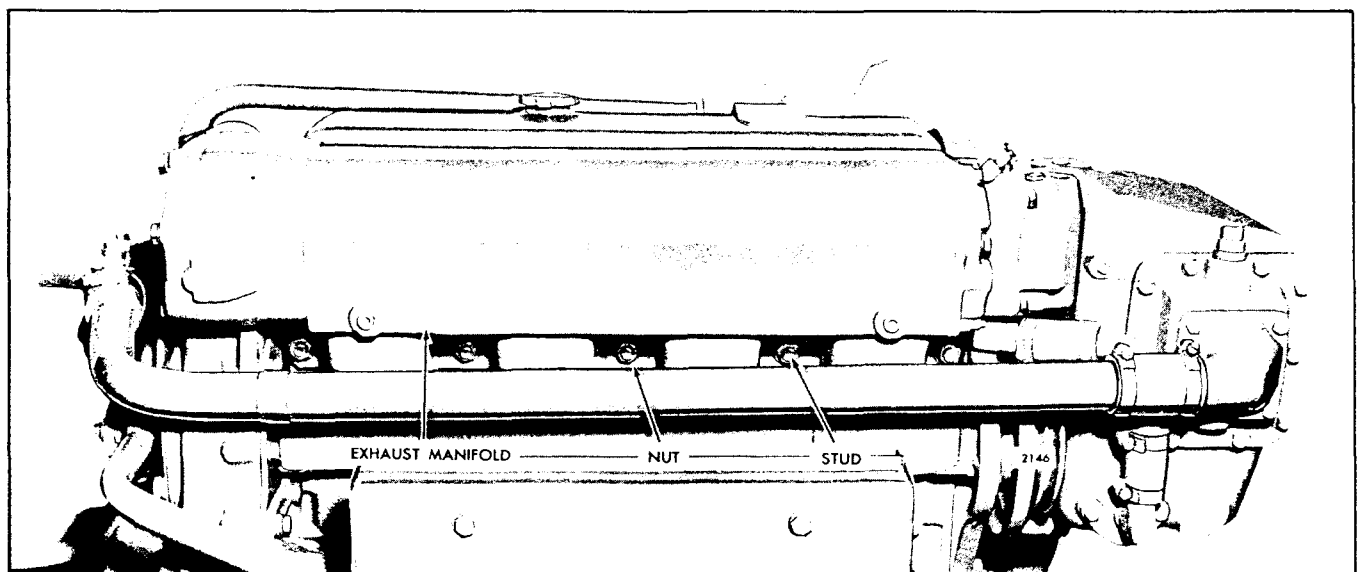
Typical Water-Cooled Exhaust Manifold Mounting (In-Line Engine)
